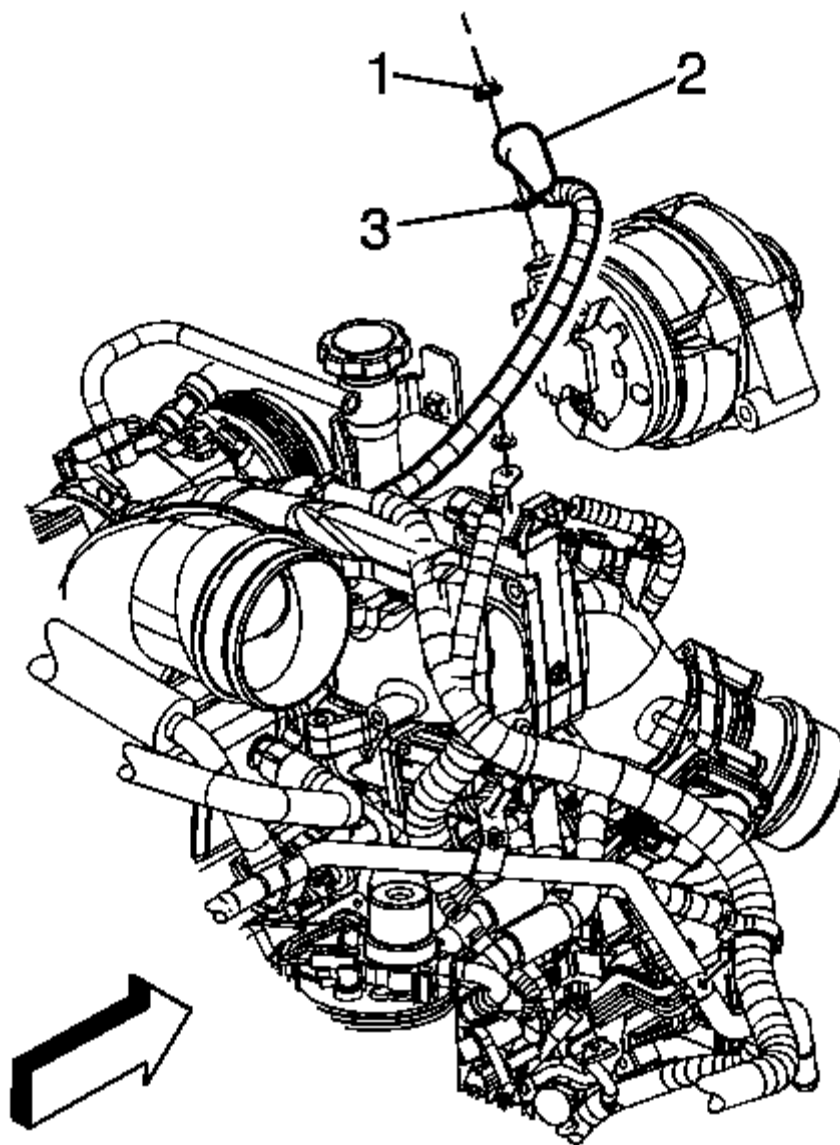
View Of Engine Wiring Harness Terminal, Boot & Nut
